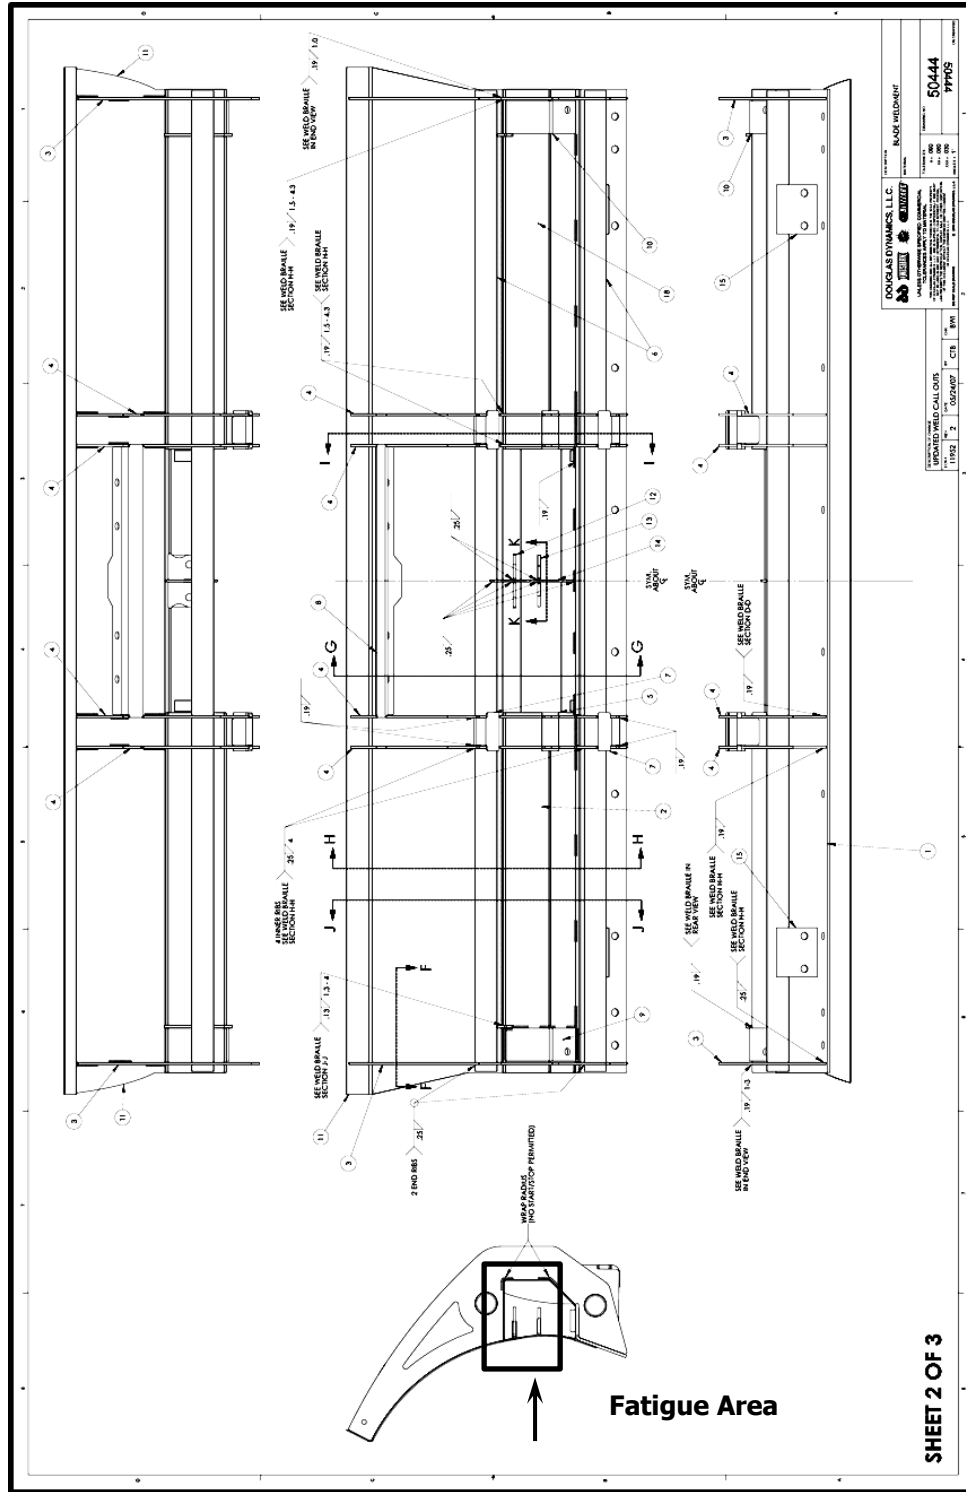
The weld drawing for the hinge snowplow main blade showing the fatigue area.
